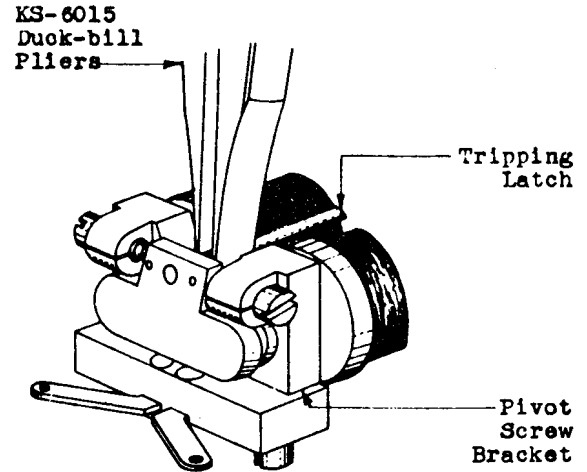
Method of Adjusting for Tripping Latch Position on 4 Type Drops
